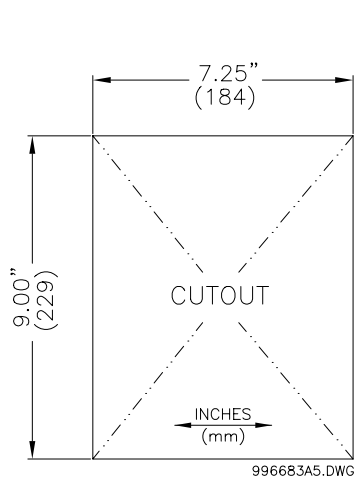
SINGLE SR469 CUTOUT PANEL
